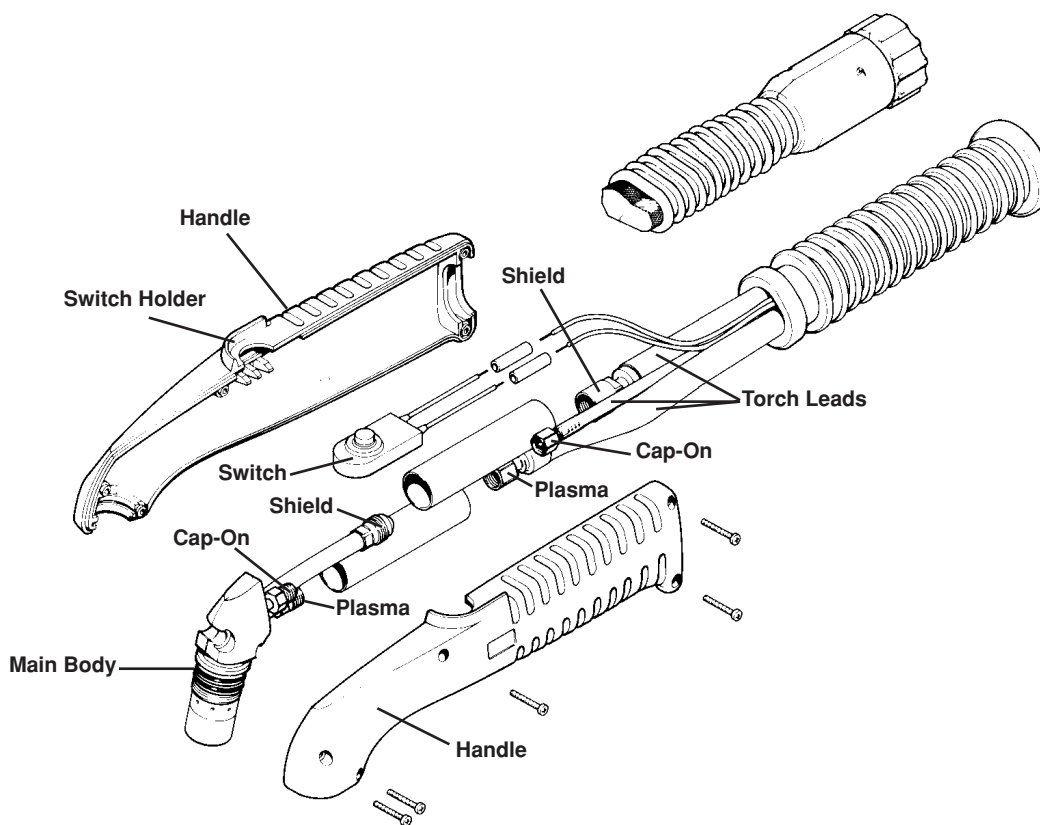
PAC160 or PAC160E Hand Torch Assembly
